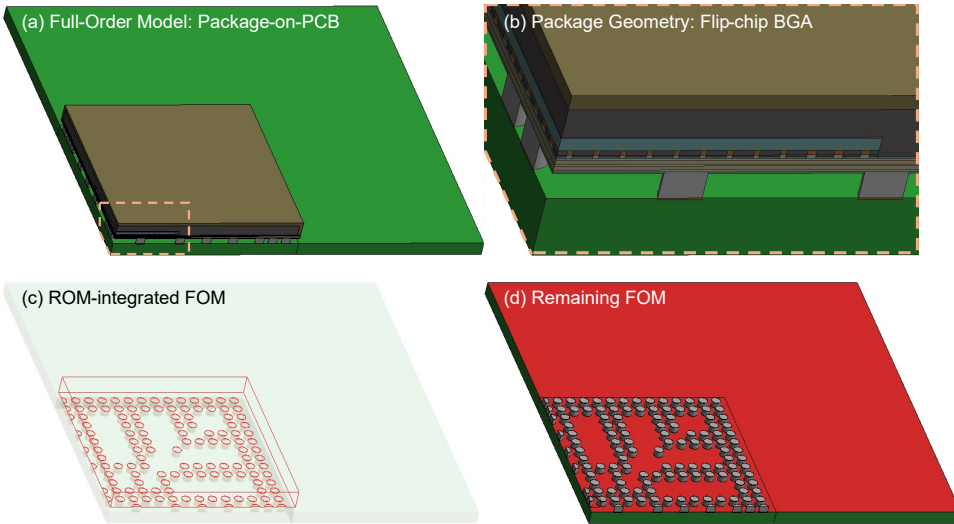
The second test case for the ROM-FOM interface – (a) the quarter geometry of the full-order model of the package-on-PCB assembly, (b) detailed model of the flipchip BGA package (representing 3000 h of thermal ageing of EMC) with copper pillars, solder caps, and a multi-layered substrate within the package, (c) ROM-integrated FOM with 129 interface nodes located on top surfaces of the cylindrically shaped board-level solder interconnects, and (d) the solder-PCB subassembly, *i.e.*, the remaining FOM, with the PCB top surface indicated in red and used for warpage calculation.
